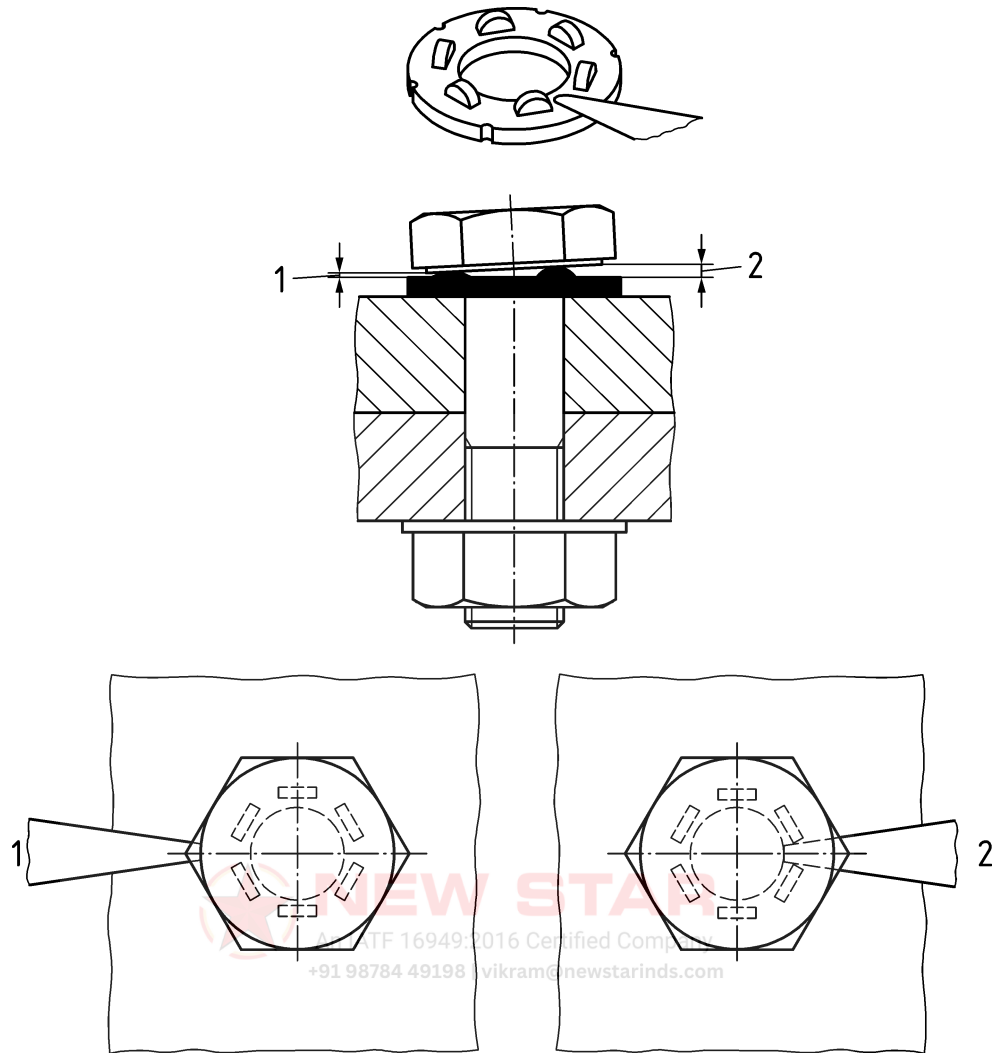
Tightening of the assembly by turning the bolt (alternative method of assembly)A.3 Checking
